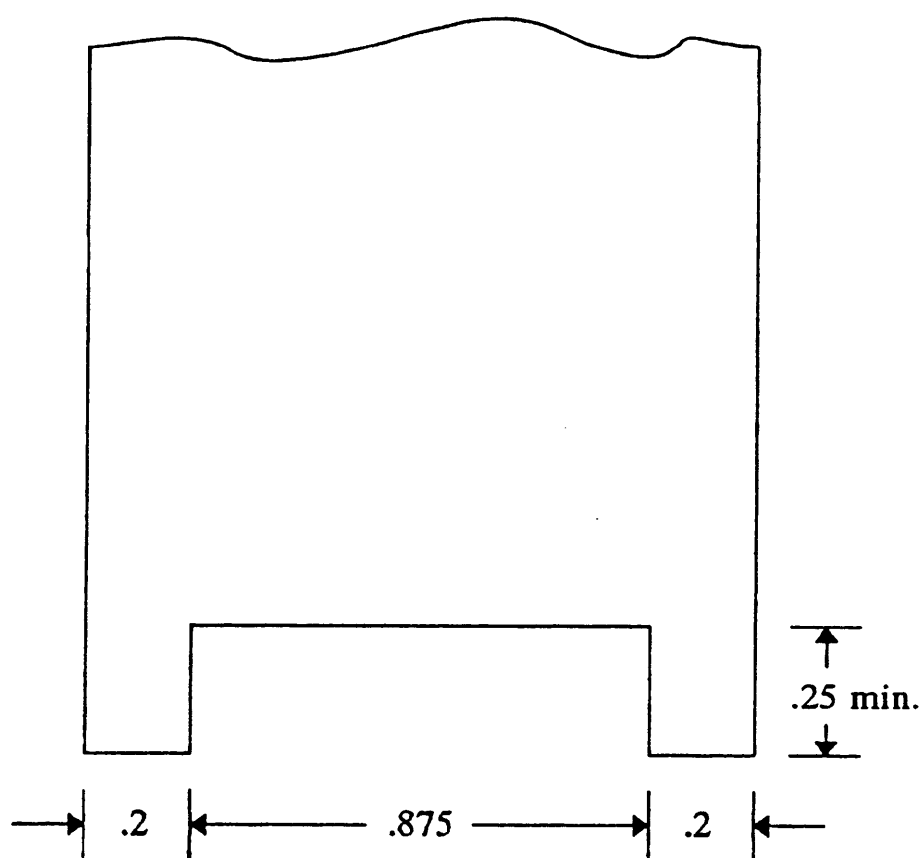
Detailed view of pedestal for spring, retention, fixture.
